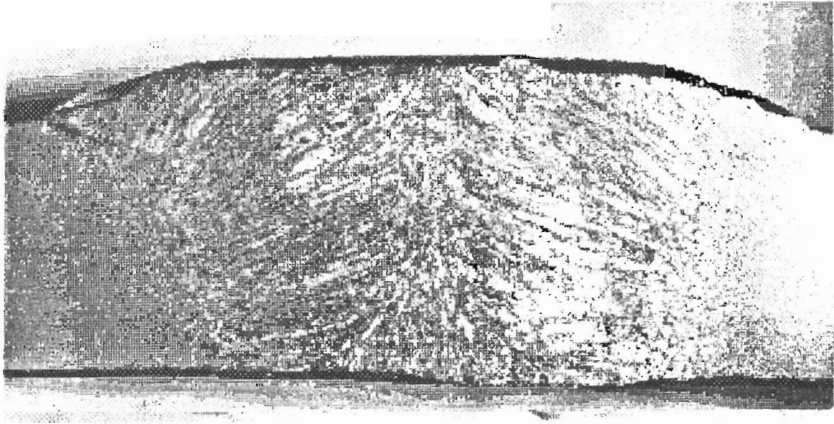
Macrograph of St3SY steel welded joint
